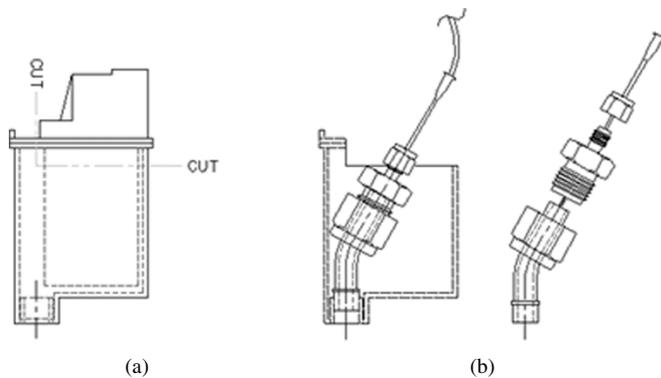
(a) Side view—cut lines on printer ink cartridge. (b) Side View—section and assembly of modified ink cartridge.
